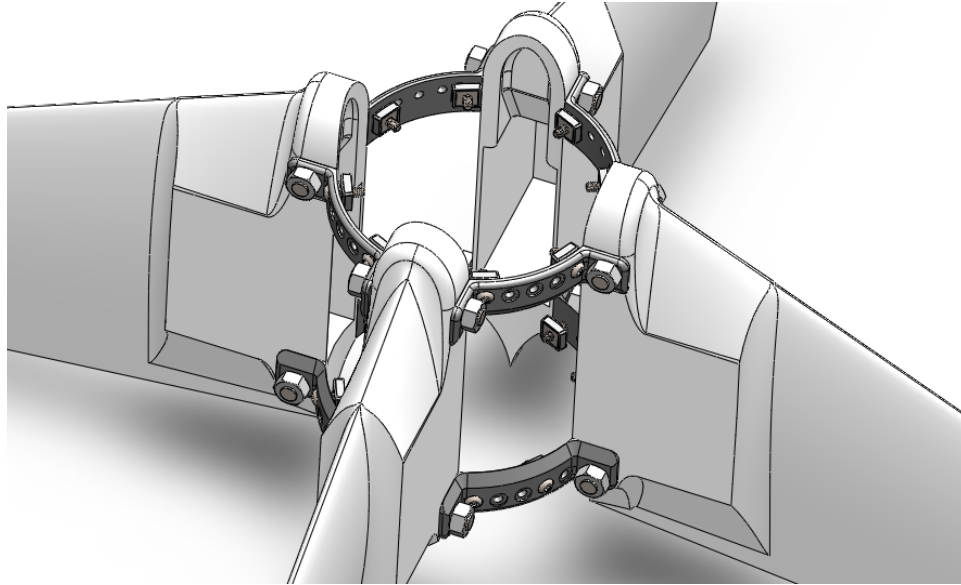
Model of the fin and bracket assembly separated from the motor bay tube. The 8 bracket pieces can be seen with fixtures through some of the provided holes.
